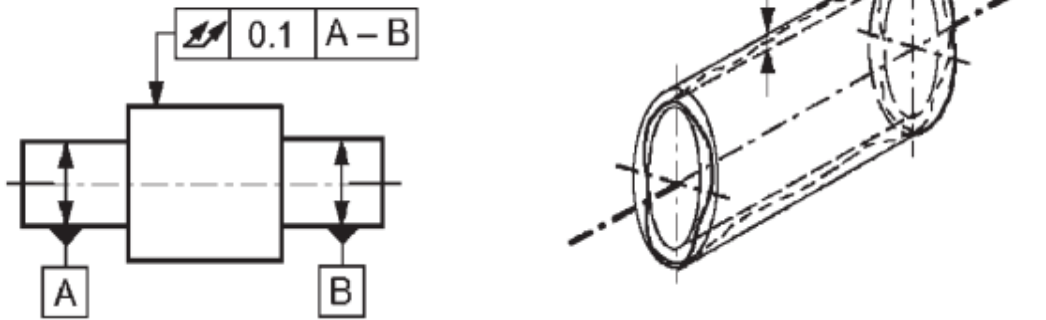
Tolerance of Cylindrical surface Relative to Datum Axis A–B
